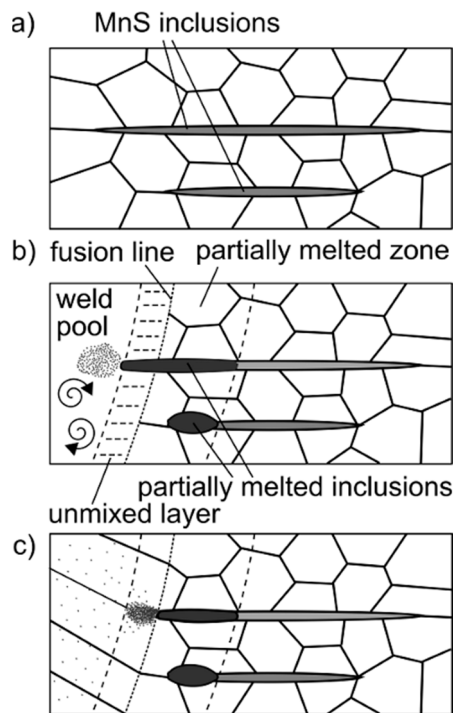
Constitutional liquation mechanism of sulfide in partially melted zone. (a) before welding; (b) during welding; (c) after welding.
